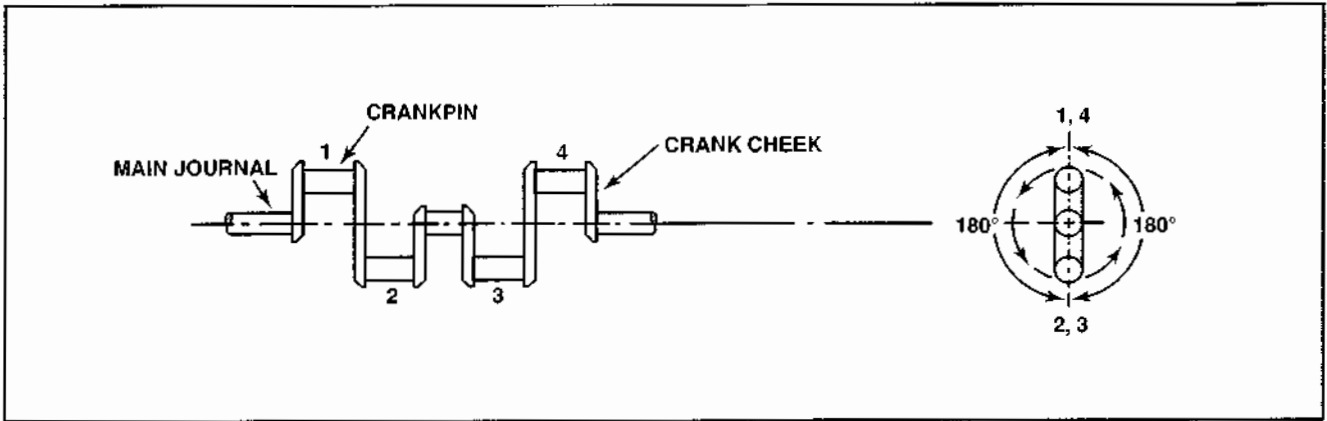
On a four cylinder engine, crankpins one and four are 180 degrees apart from crankpins two and three.
